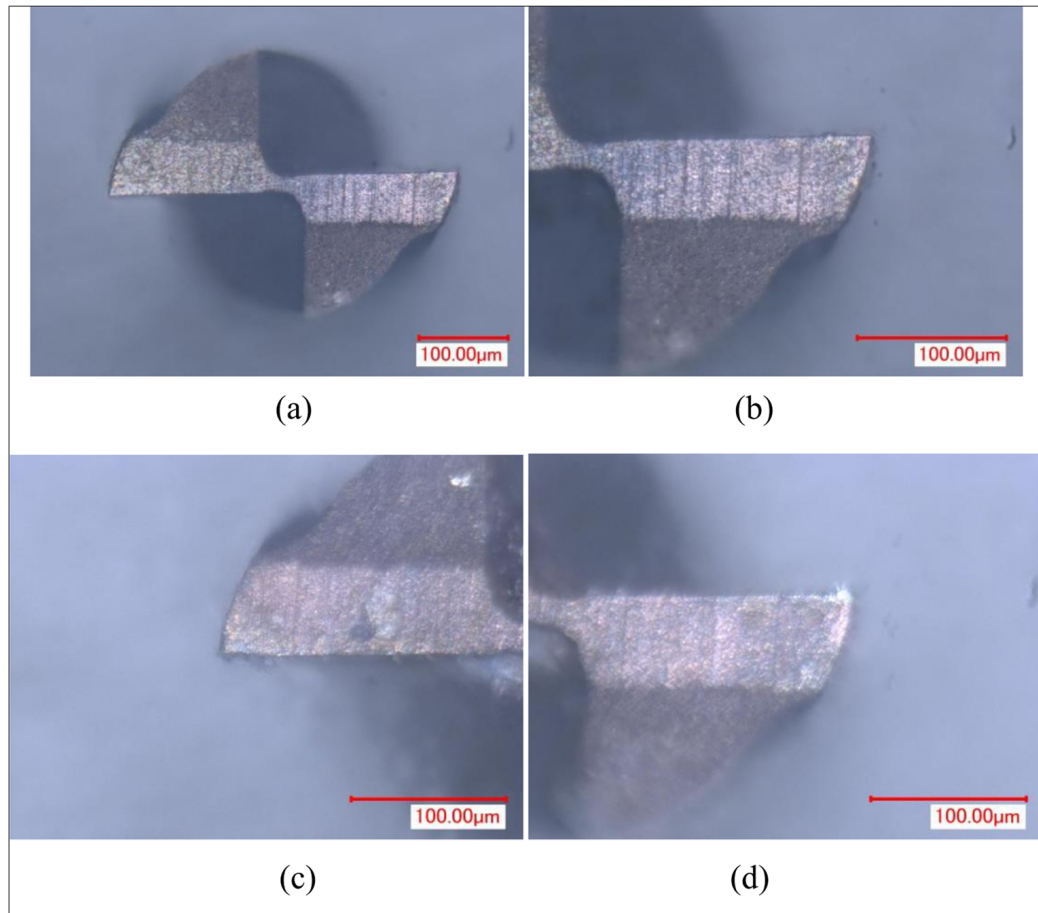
Tool edge condition. *a.* New micro end mill. *b.* Cutting edge of the new micro end mill. *c.* After radial immersion tests right edge. *d.* After radial immersion tests left edge
